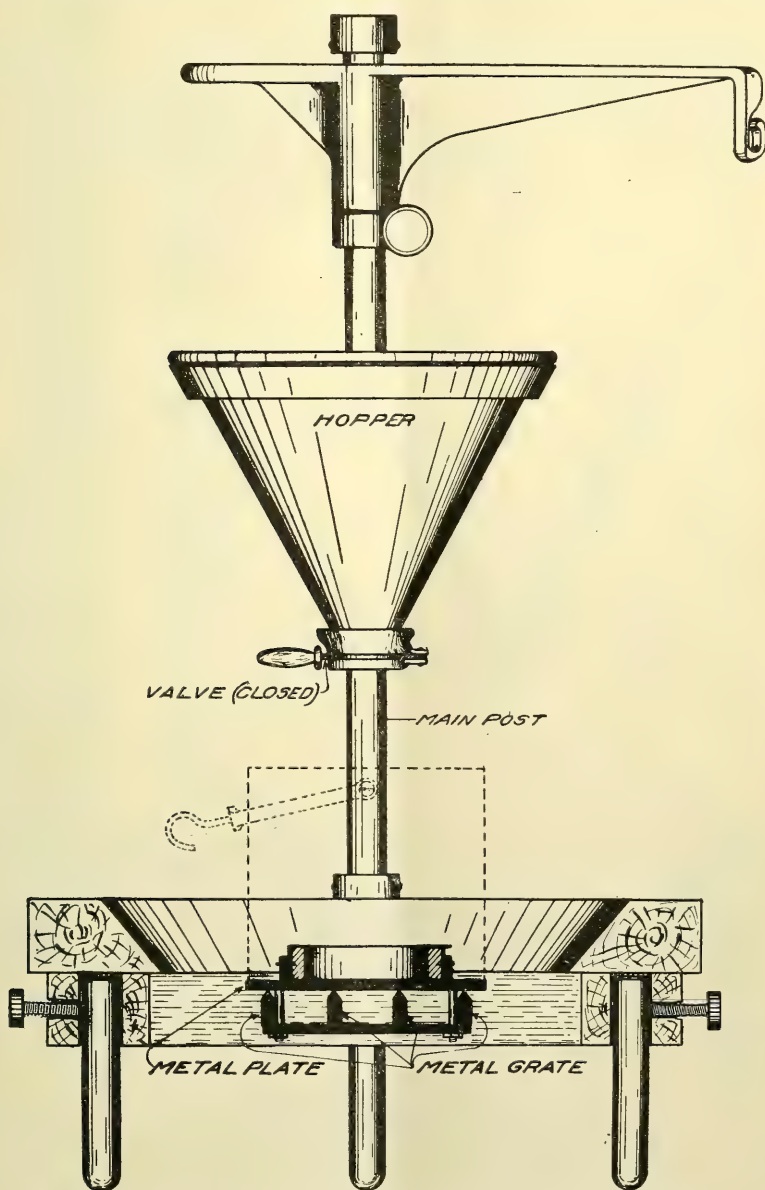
Sketch showing how the plate is bolted on the iron grating.
